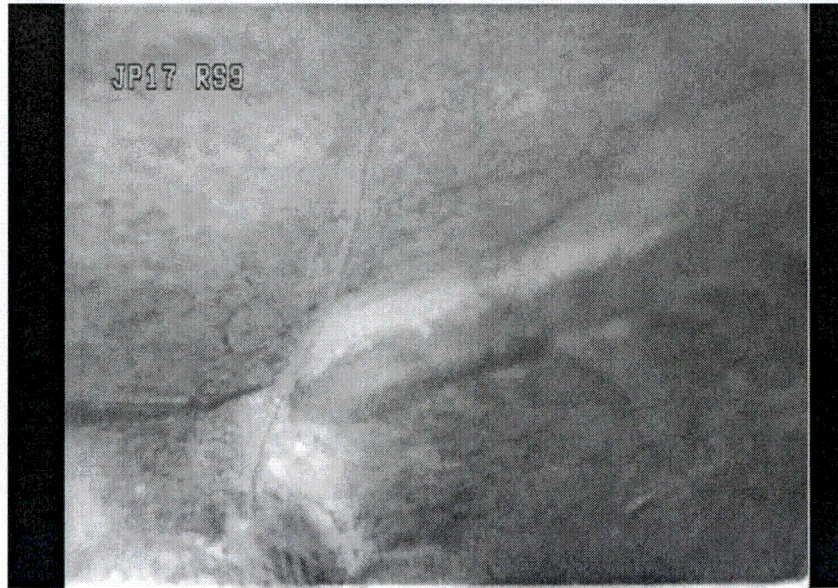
RFO20 Image of the Indication on JP-17/18 Riser RS-9 Weld
